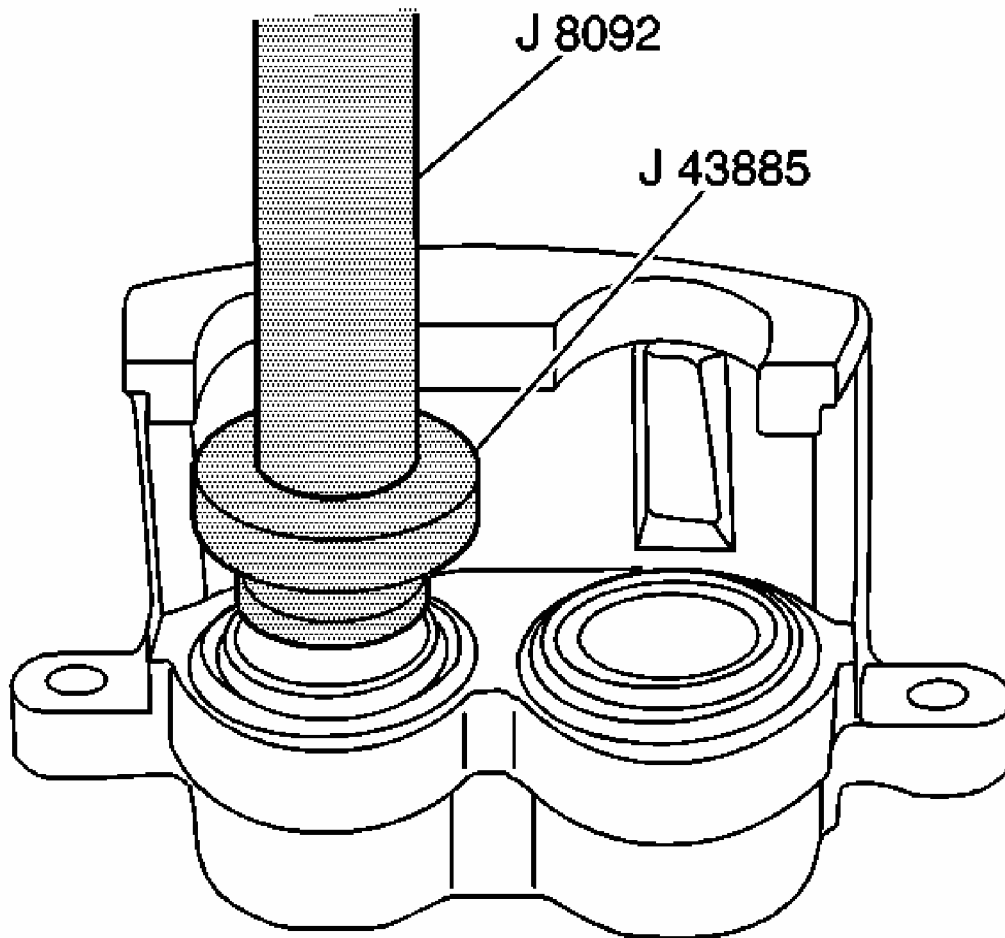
Installing Boot Seals Into Caliper Housing Bores
